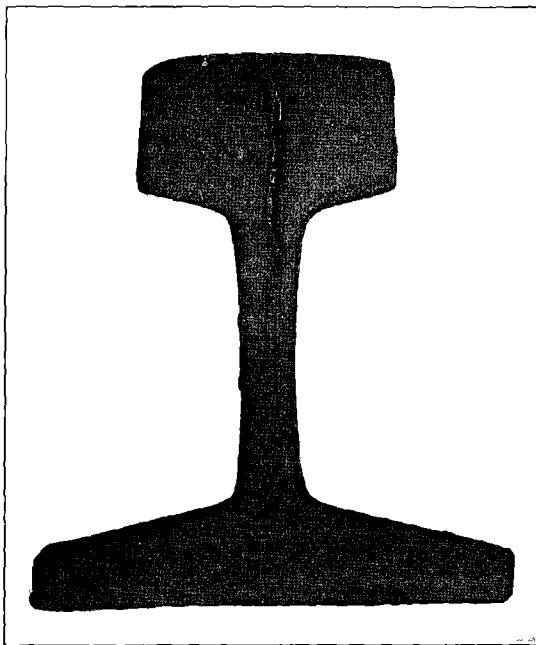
Cross section of rail shown in Fig. No. 11. Split head from which a horizontal shearing fracture started detaching the upper portion of the head.
